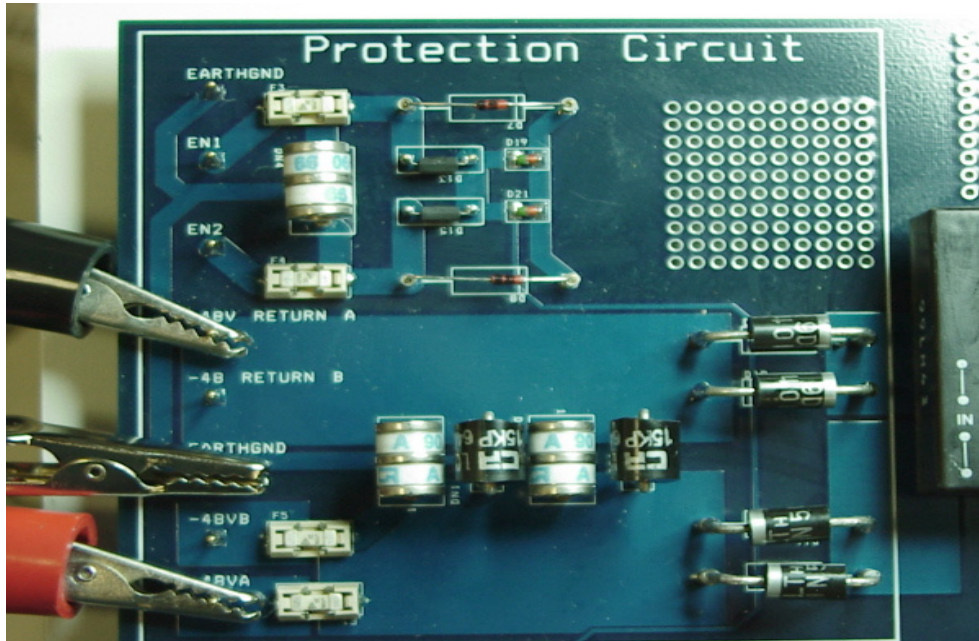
PCB protection circuit area and connections of the test equipment to the DUT
